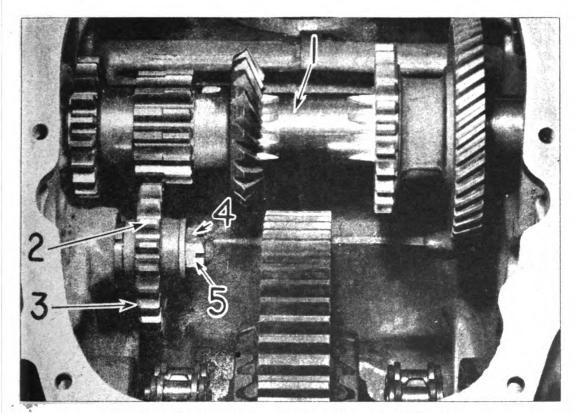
First Reduction Shaft and Reverse Idler Gear
